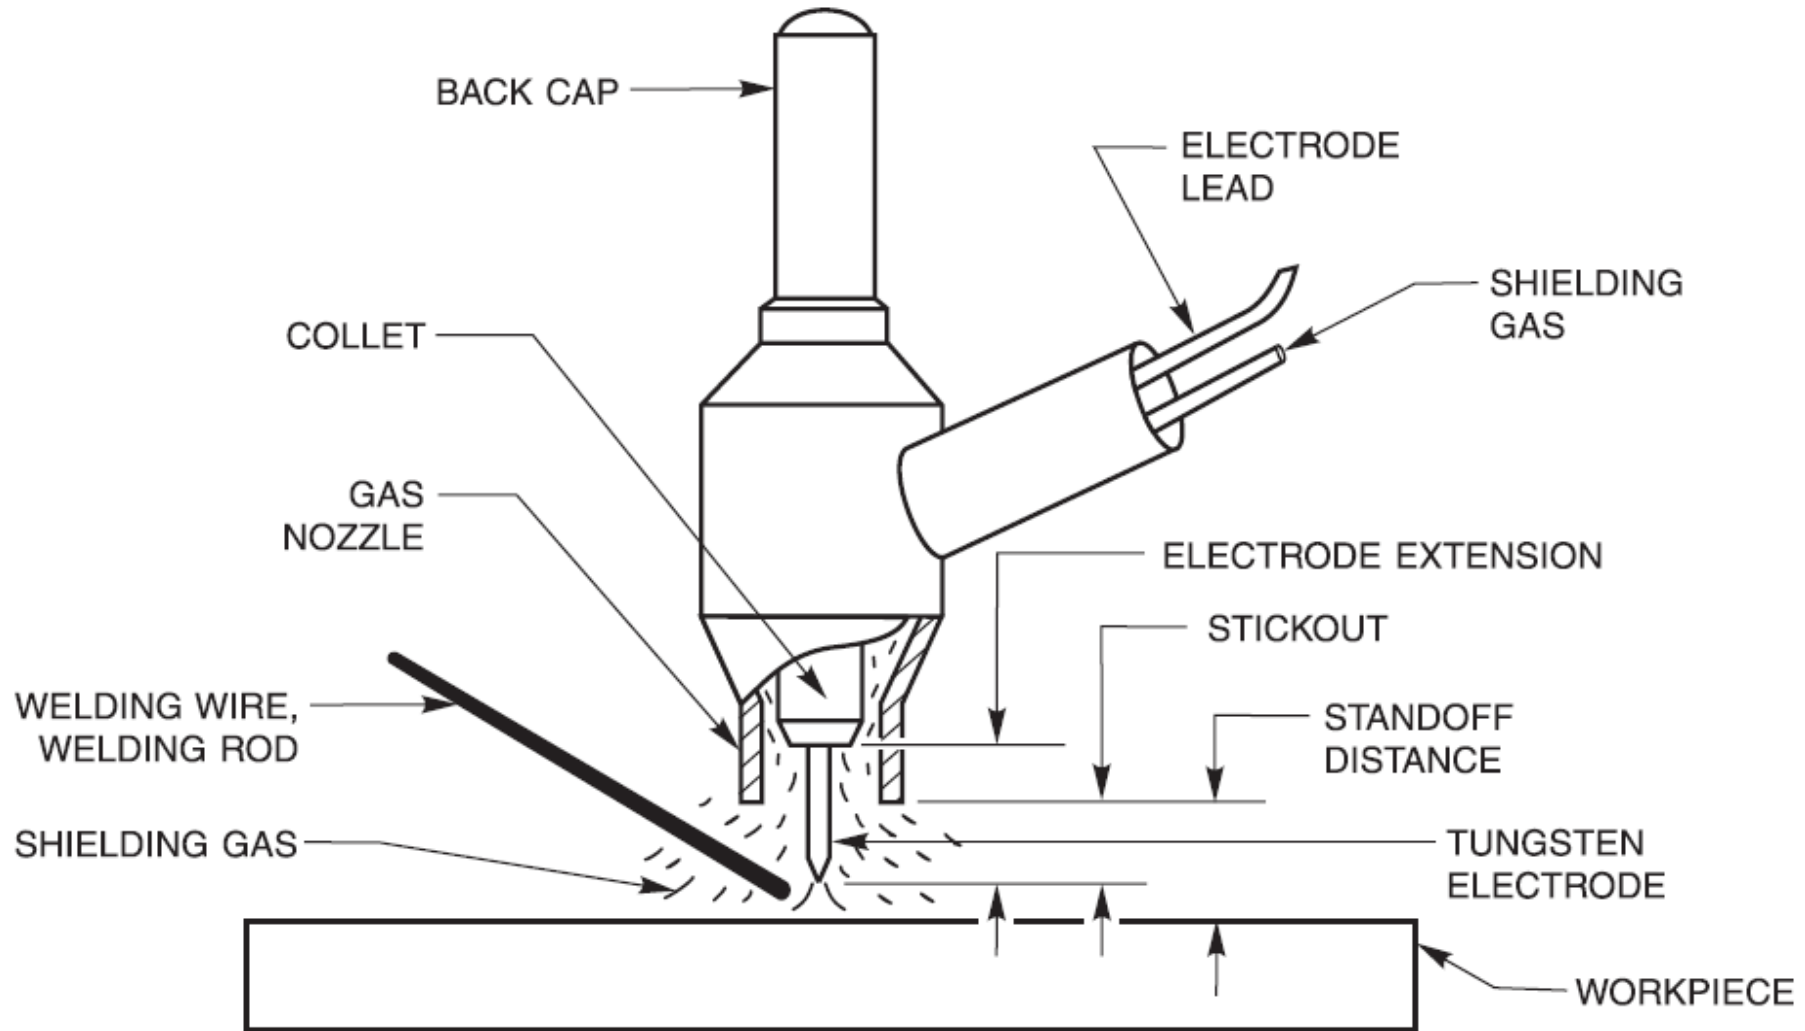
Gas Tungsten Arc Welding Torch Nomenclature
